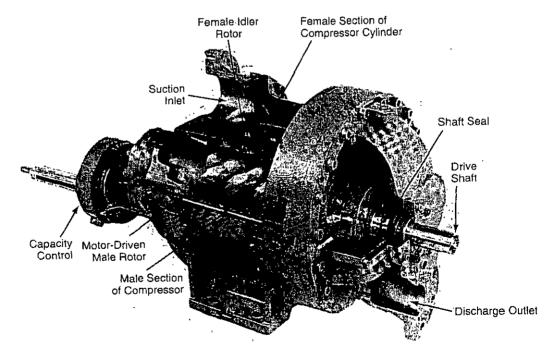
Screw compressor which uses a matched set of helical rotors. (Dunham-Bush, Inc.
